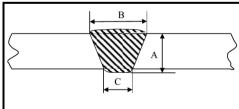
Weld pool geometry; Penetration (A), Face width (B), Back width (C)
